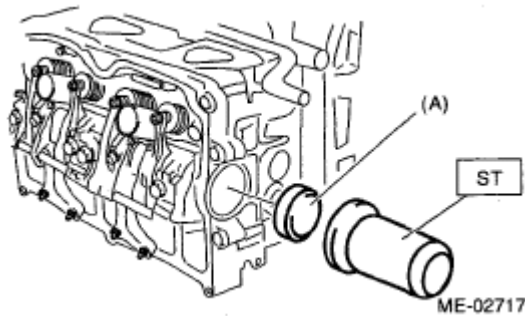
Installing Plug Using Camshaft Oil Seal Installer ST (499587700)
